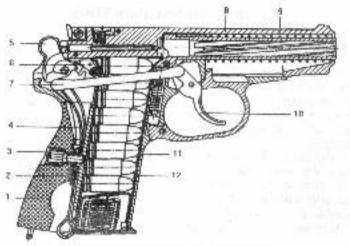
Diagram of mechanisms of U-70 twelve-shot pixtol in 9 mm Makarov or Kurz caliber.
